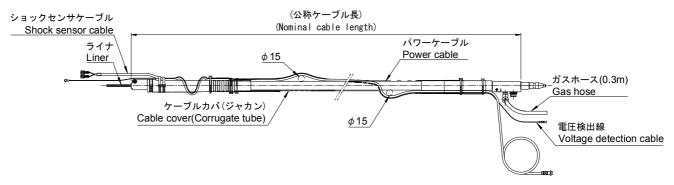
Outline drawing of the coaxial power cable (For NB6 / NB6L manipulator (with voltage detection cable))
